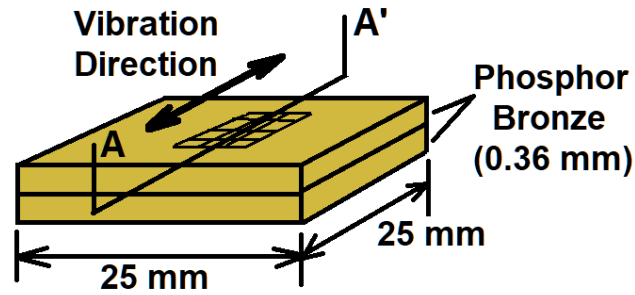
Sectioned view of the weld specimen used for microscopy
